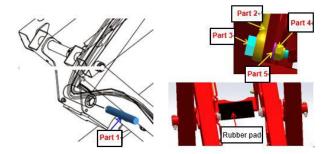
Assembly of lift cylinder (lower end)1. Pin 2. Safety pin 3. Bolt 4. Nut 5. Washer
